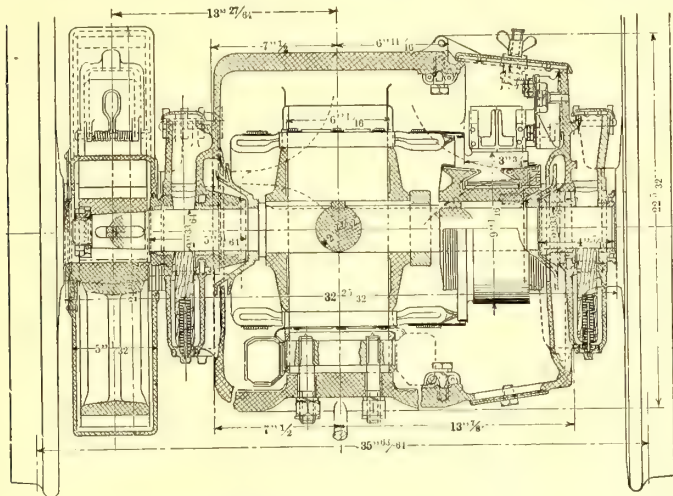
LONGITUDINAL SECTION OF MOTOR
